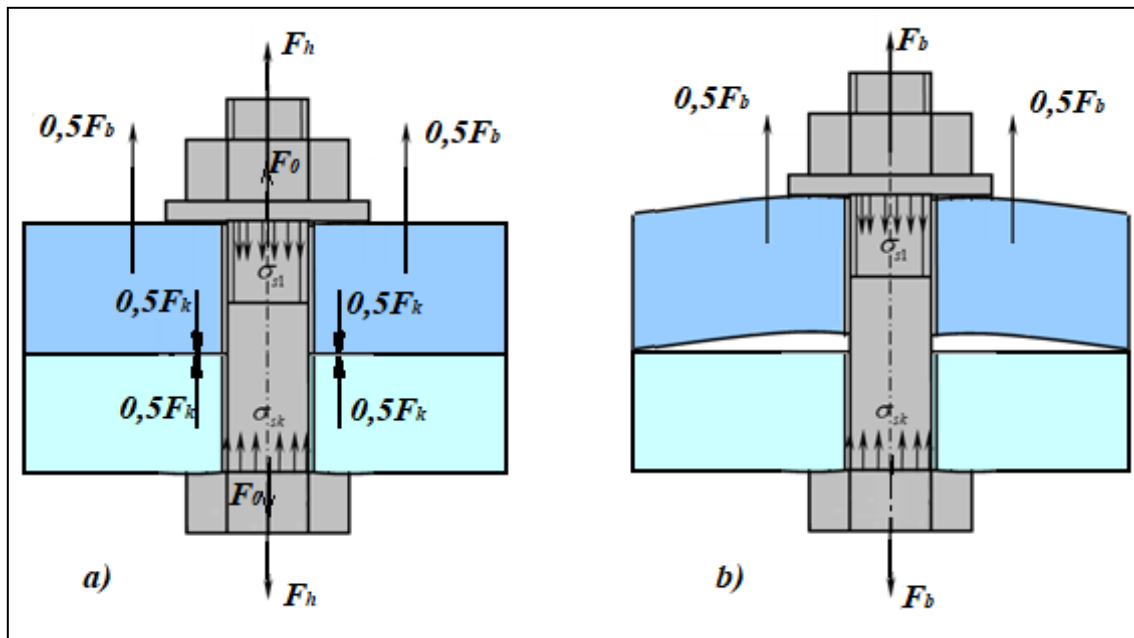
Design scheme of the bolted connection of the parallel-shaft reducers
